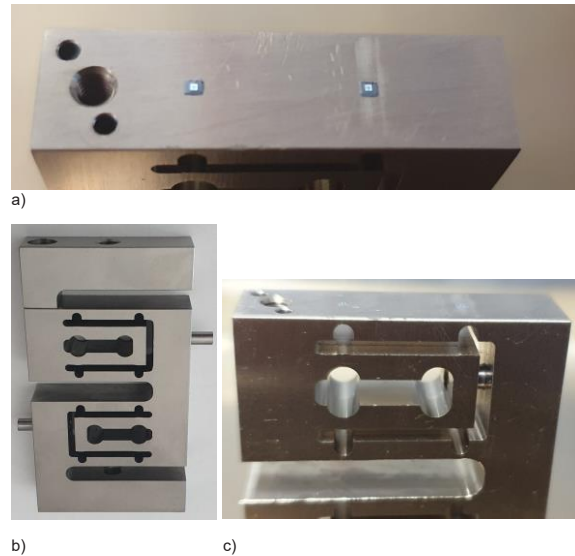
a) Assembled Si-Strain Gauge with glass frit, b) Two-stage spring body, 60 mm*30 mm*10 mm, stainless steel 1.4542 c) Focus on the inner parallel spring and the driving pin.
